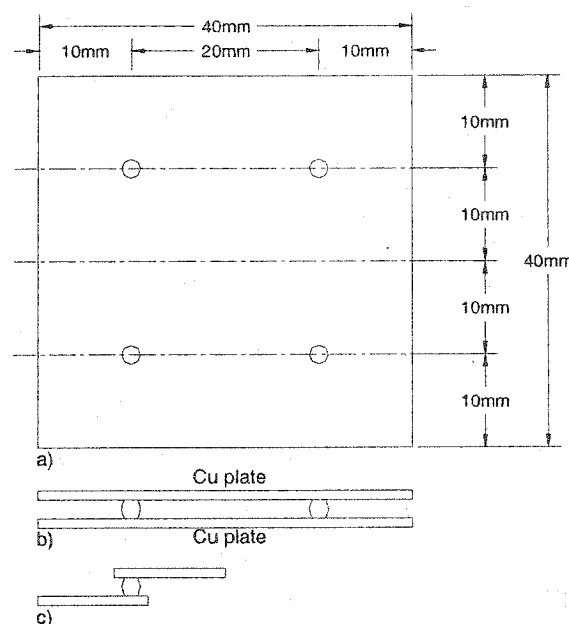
The schematic diagram of the Test Vehicle (a) plane view and (b) side view (c) test vehicle after cross-sectioned with a diamond wheel saw
